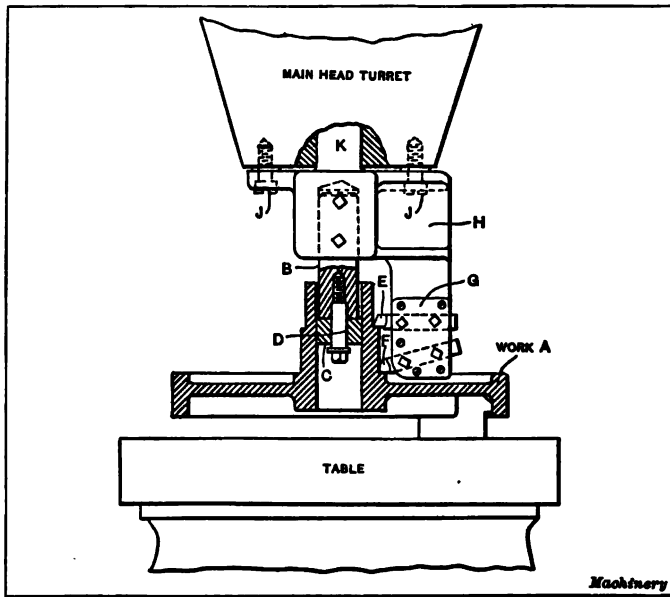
Multiple Turning Tool for Vertical Turret Lathe
